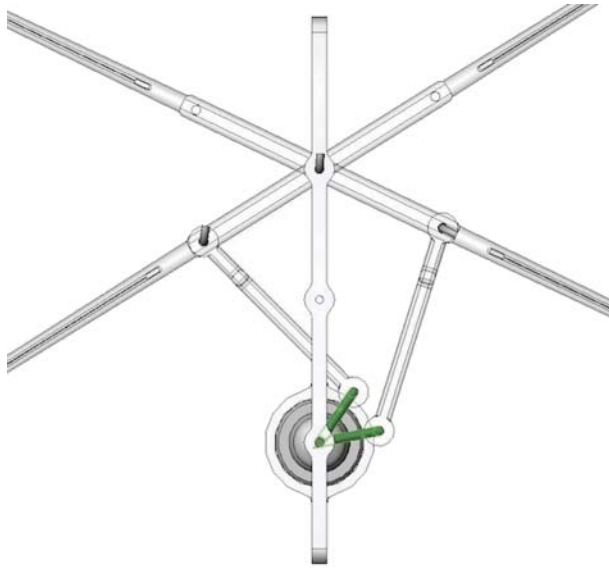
Top view of ornithopter mechanism showing offset-crank geometry.
